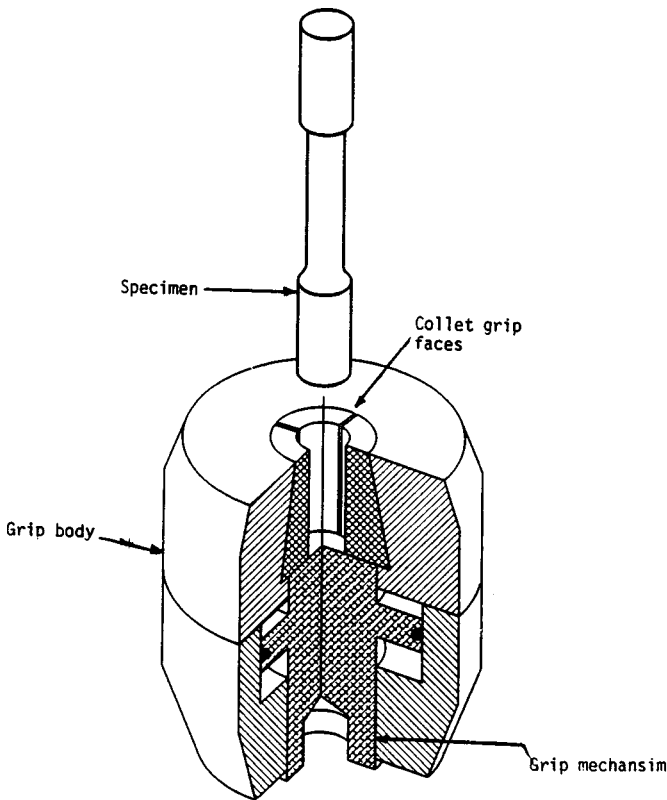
Example of a Smooth, Split Collet Active Gripping System for Cylindrical Specimens
